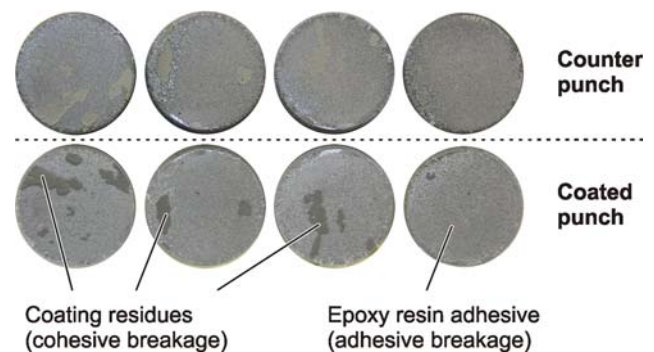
Fracture surfaces of the samples after the adhesion test
